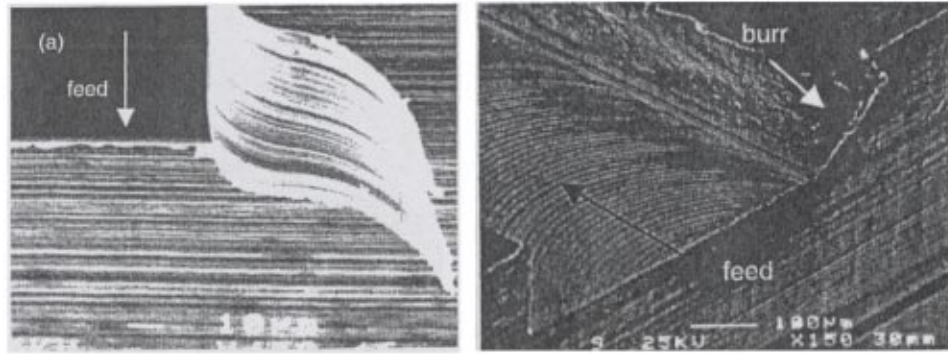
Burr formation in micromilling: (a) flag-type burr on tool exit and (b) rollover-type burr on tool entrance [27]
